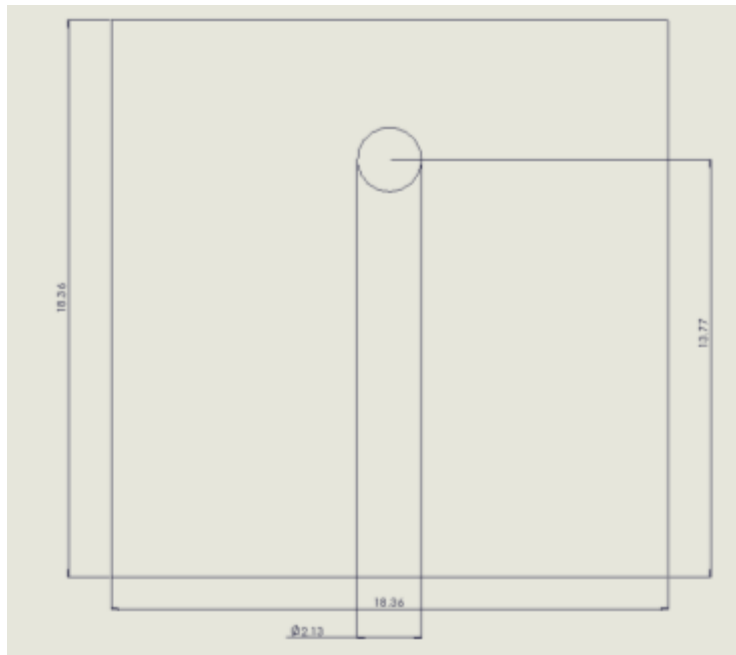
Reservoir 6_2 Dimensional Drawing
